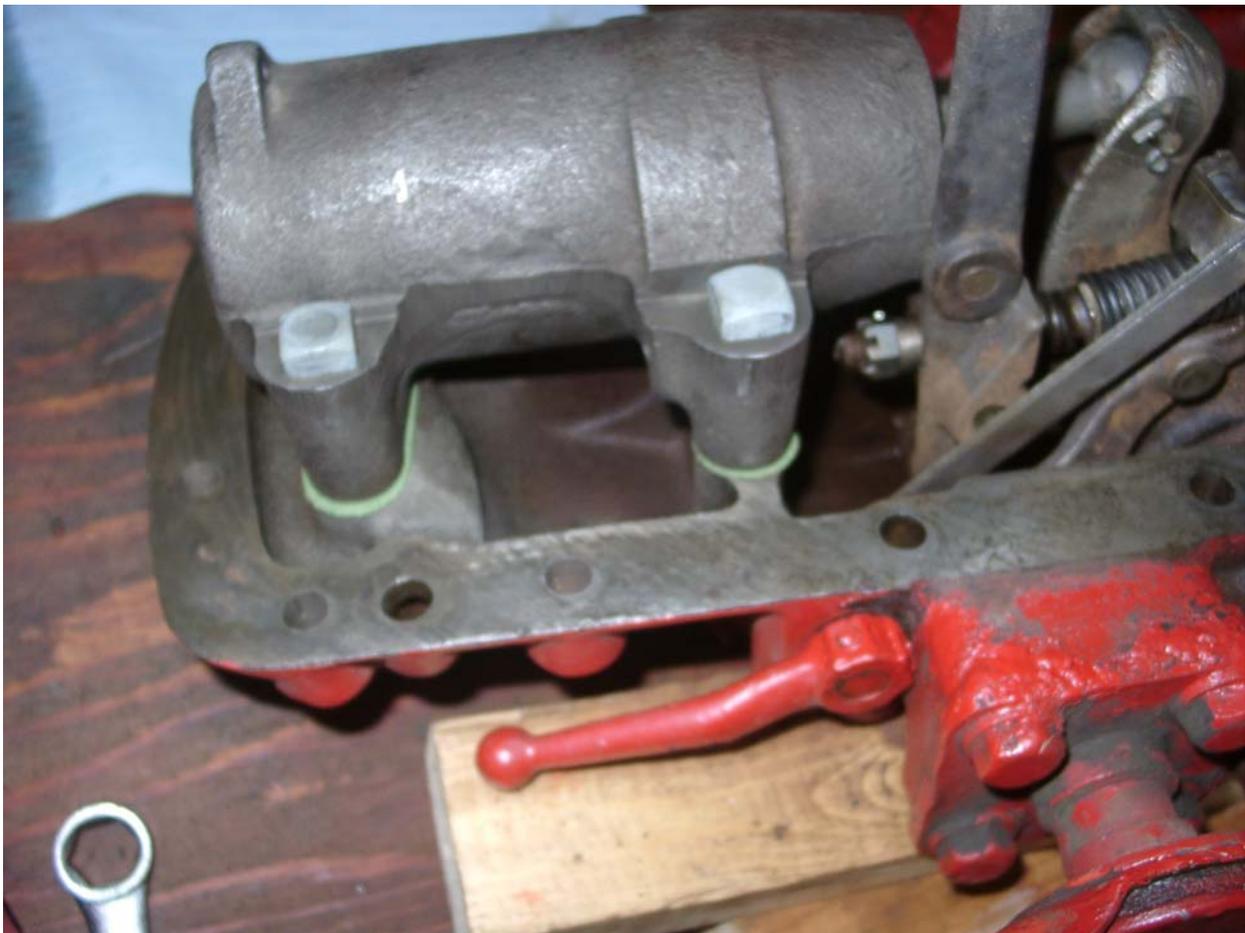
9N-510-D Hydraulic Lift Cylinder cleaned and assembled with new piston and gaskets. Note the square head bolts. Early 9N/2N setups used hex head bolts.
